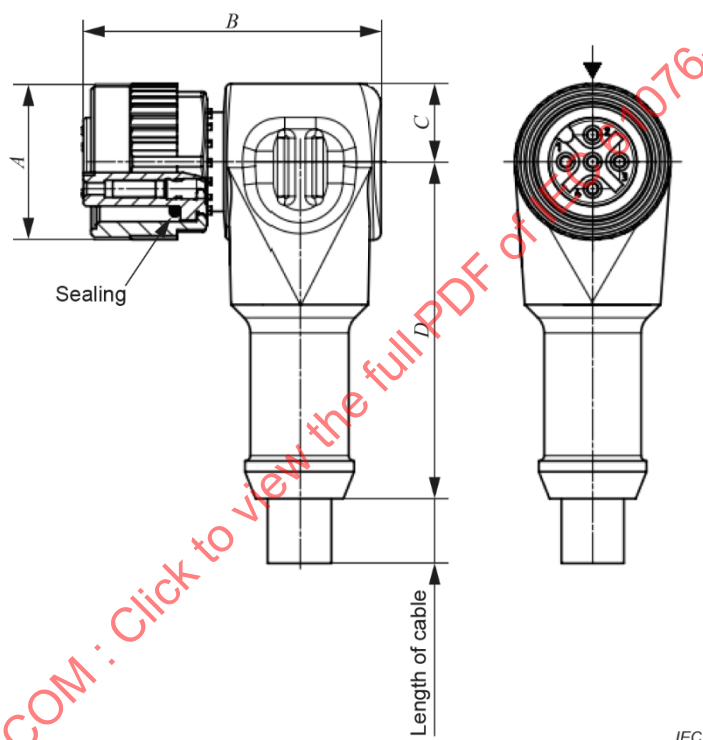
Non-rewirable connector, female contacts, right angled version, with locking nut
